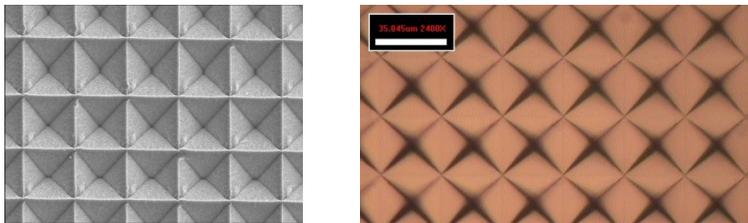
Machined surfaces (pitch: 4um, depth of cut: 2um)
